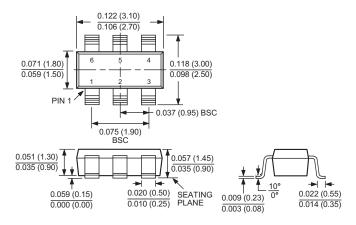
6-Lead SOT-23 Package (RJ-6)—Dimensions shown in millimeters
